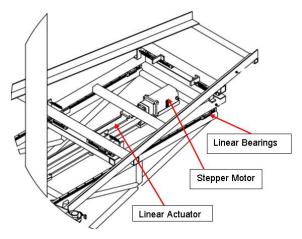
Installation location of the linear actuator, bearing, and stepper motor
